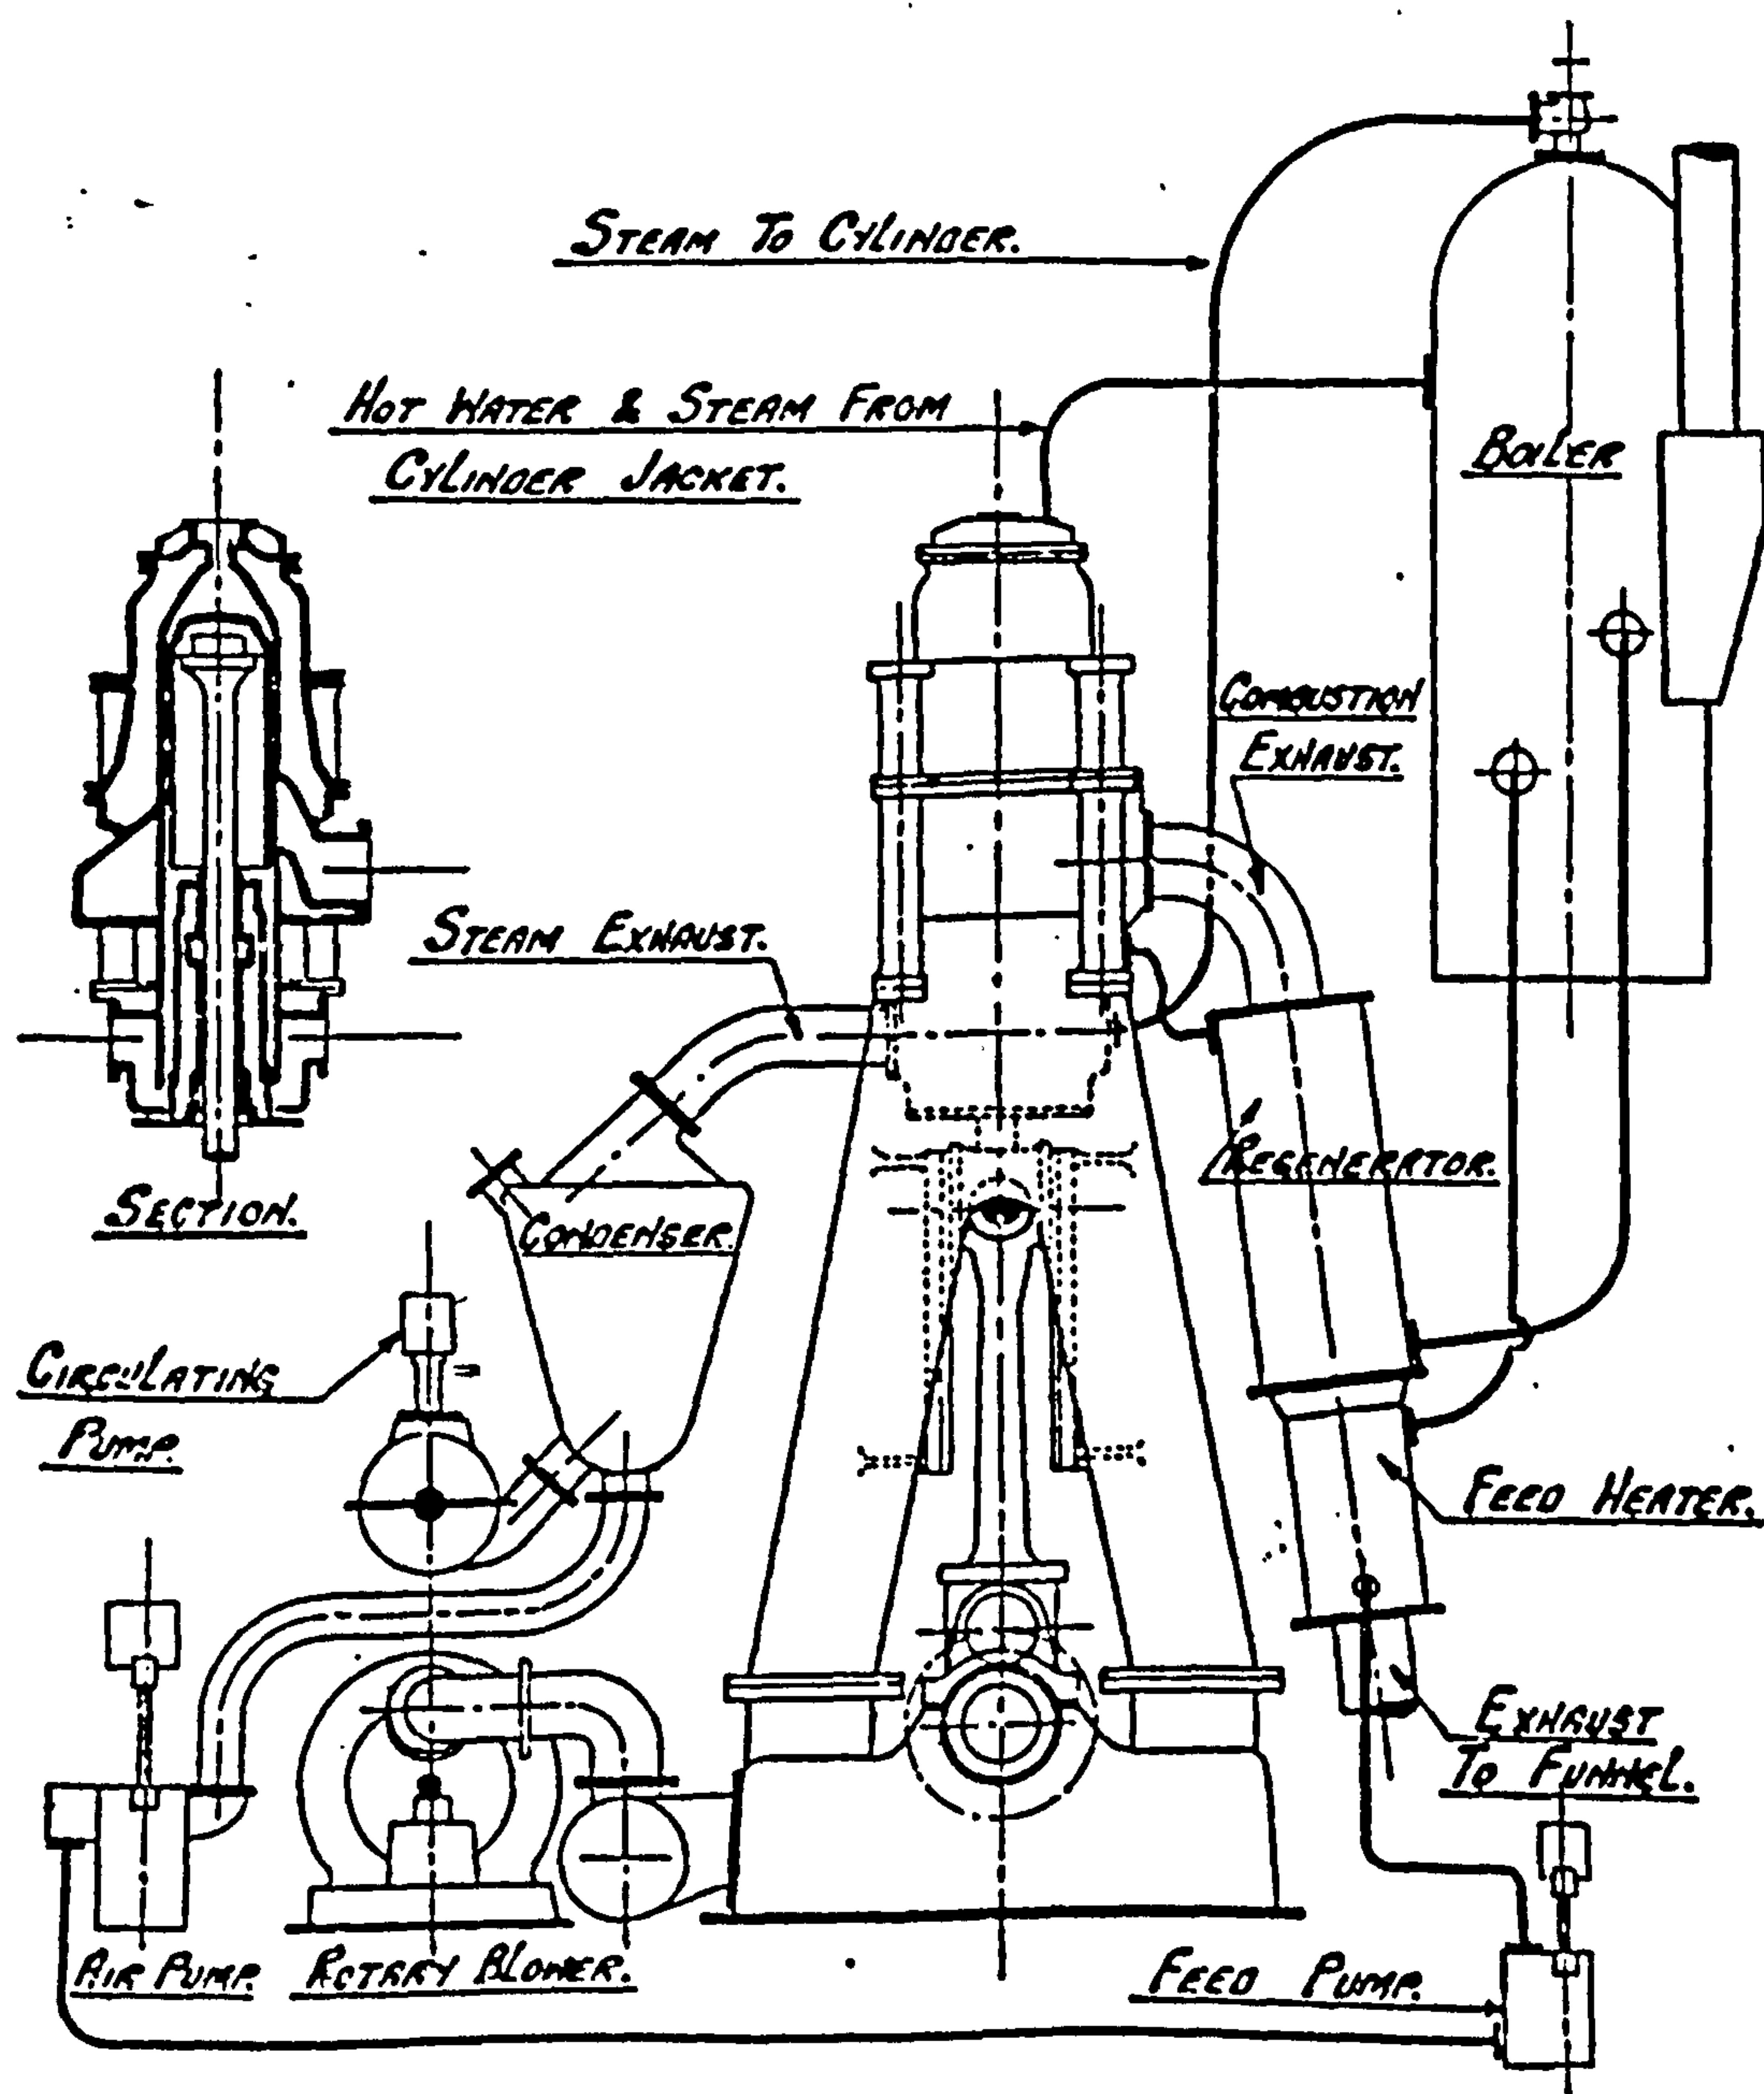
/14. ARRANGEMENT OF "STILL" ENGINE.
